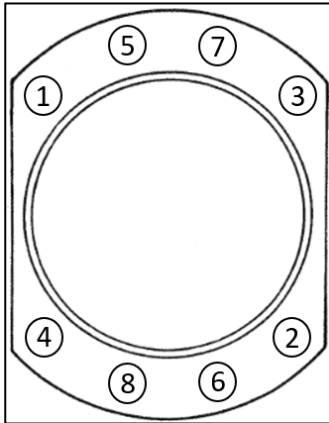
Cylinder flange torque sequence for single cylinder installation
